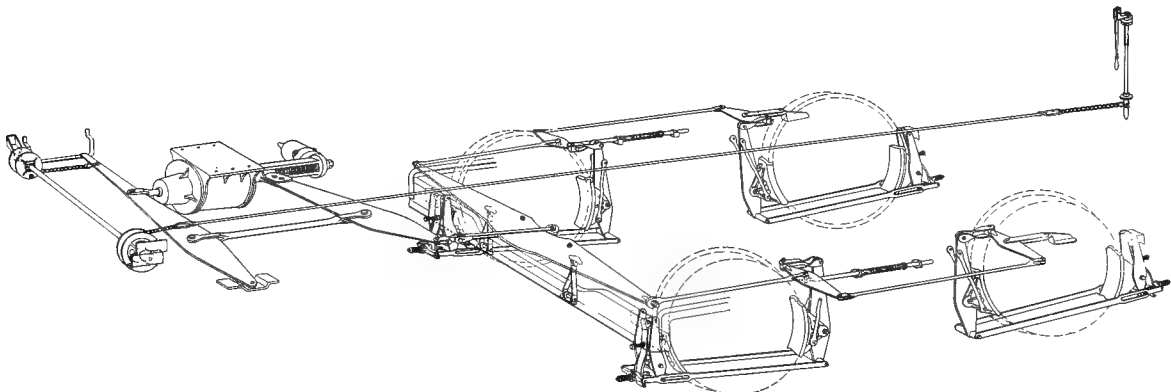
Arrangement of Brake Rigging for Clasp Brakes of New York, Westchester & Boston Suburban Cars.
